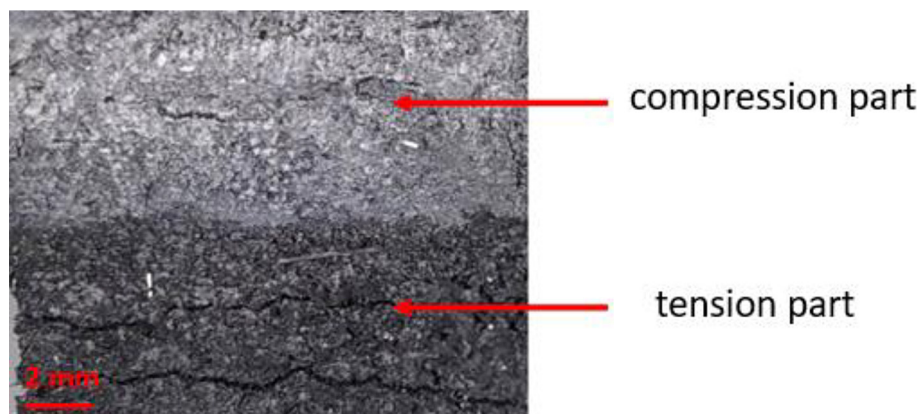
View of the fracture surface of the specimen (PA6 + GF) statically bent
